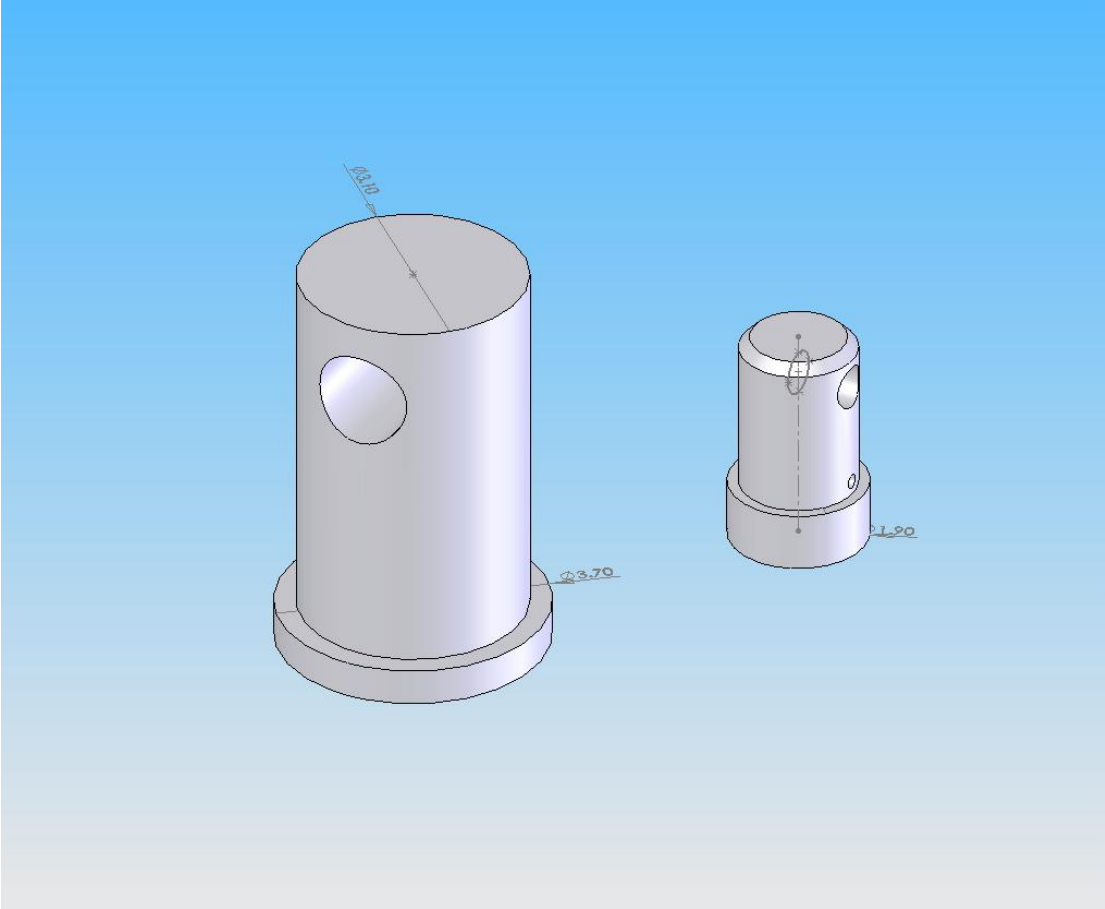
RPT Plug for Frame Base (left) and Mounting Pin Attachment
